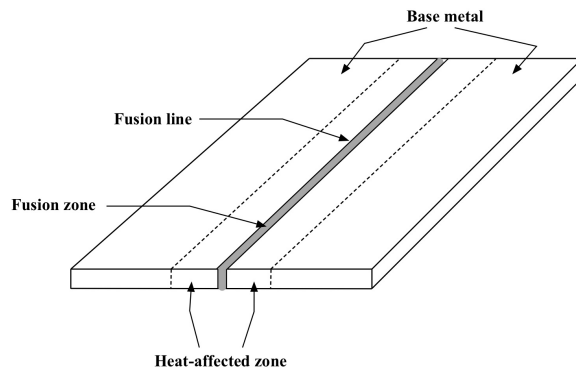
Sketch of the different zones, which form in a welded component.
